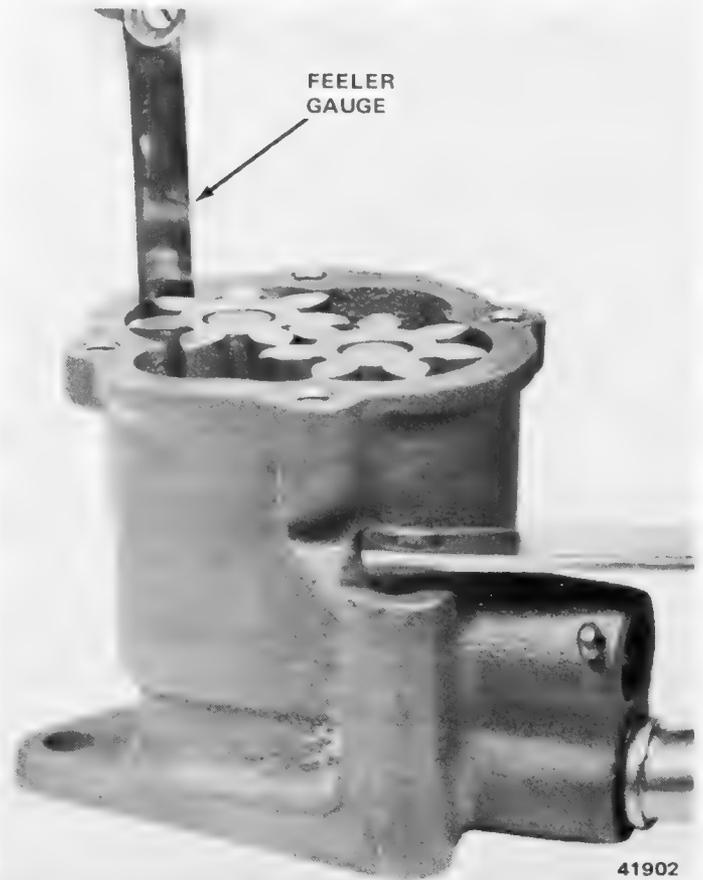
B-97 Oil Gear-to-Body Clearance Measurement
